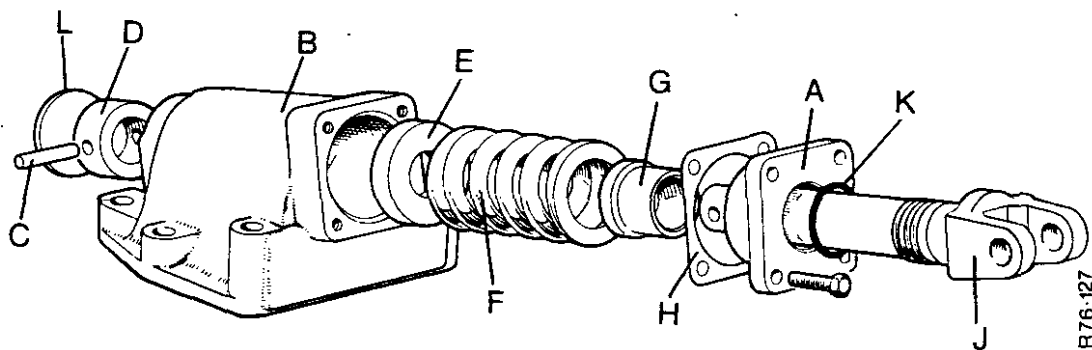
DISASSEMBLY OF THE SINGLE RATE SENSING UNIT
